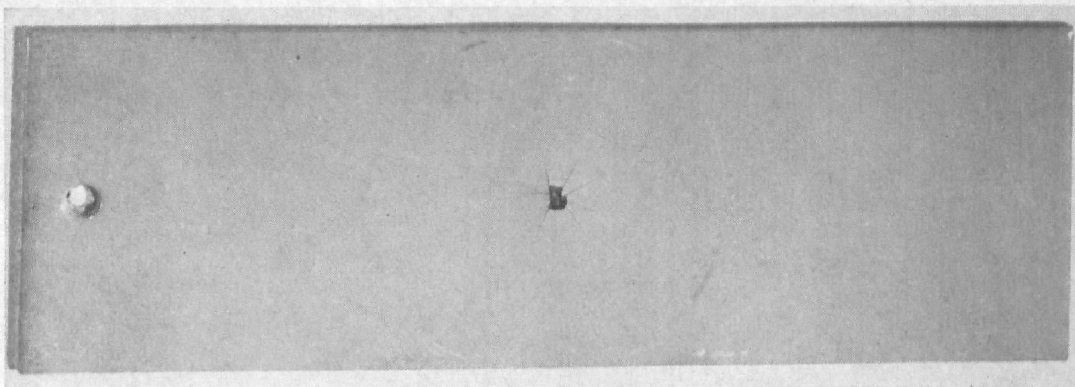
Chipping causes cracks in coatings resulting in more extensive damage.
